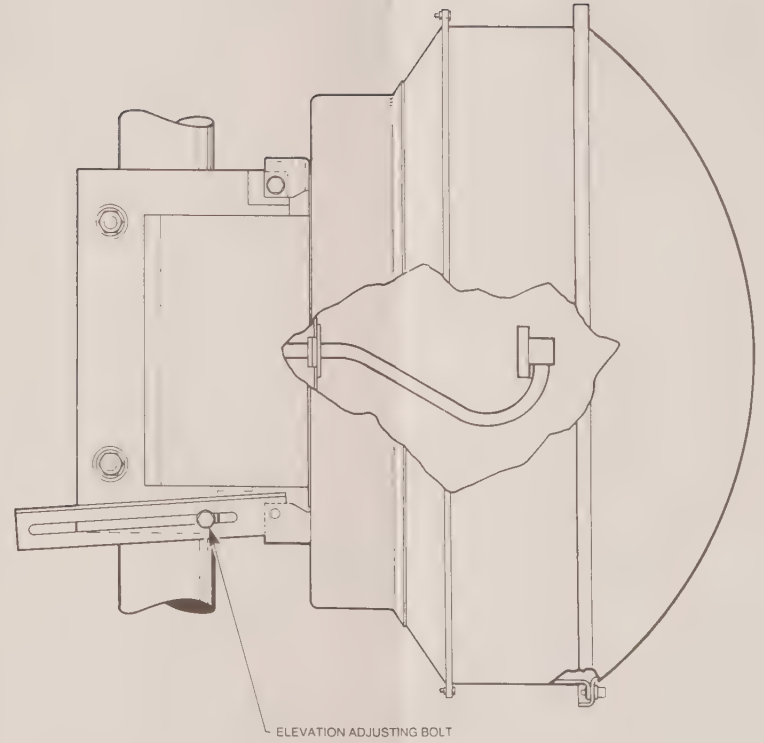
Side View Showing Elevation Adjustment Bolt
